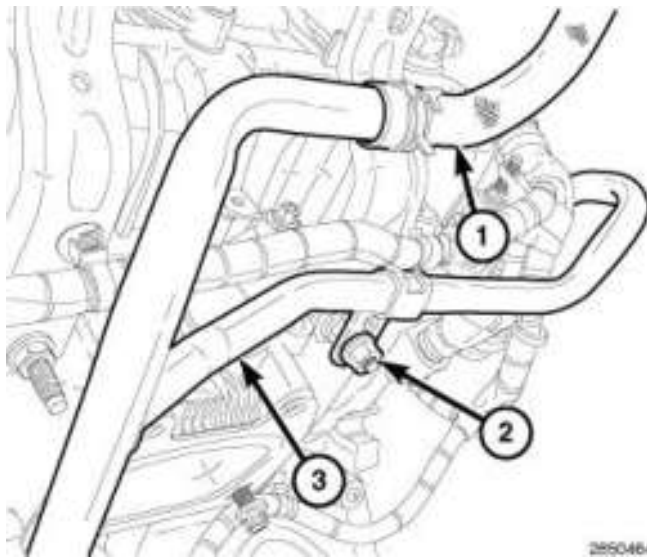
Heater Core Return Hose, Heater Core Return Tube & Nut
